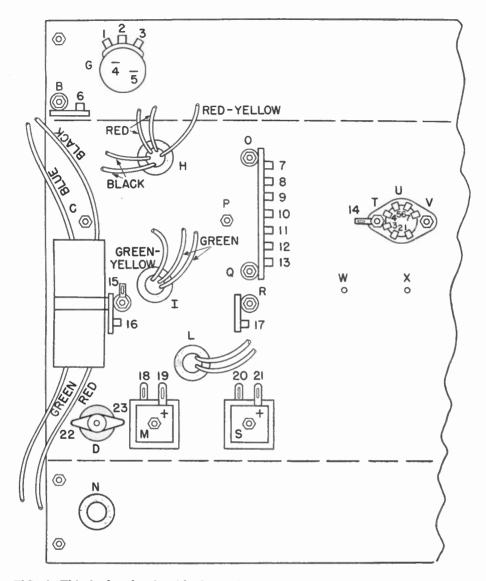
This is the chassis with the preliminary parts mounted, and the terminals identified by number.
